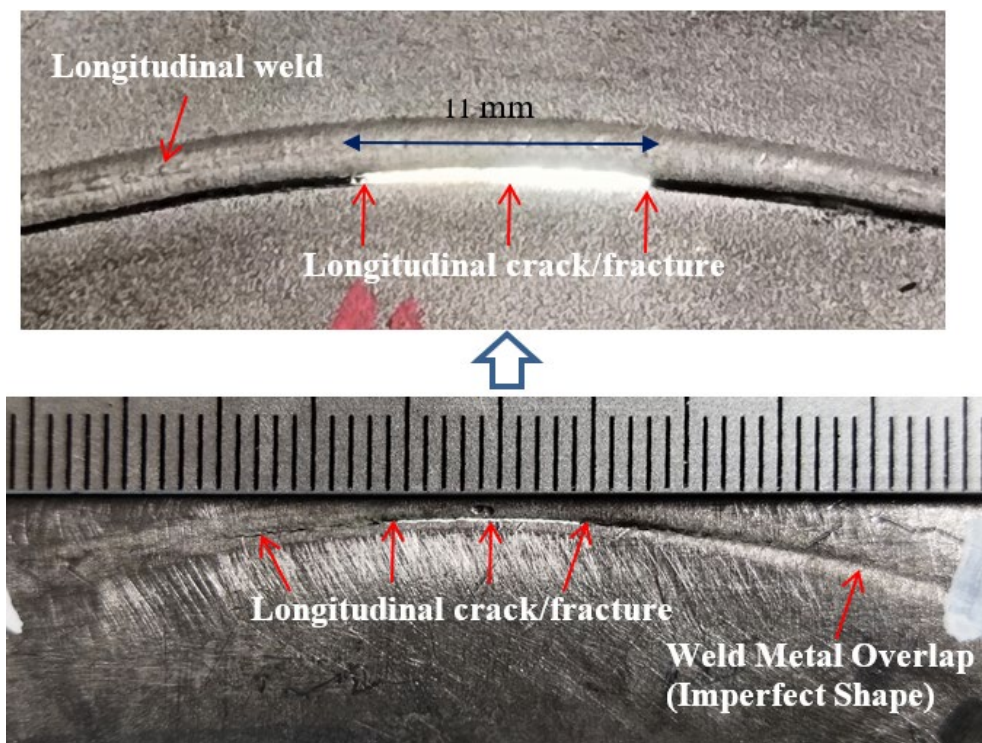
Close-up view of some internal wall of the elbow at leakage location revealing a crack or fracture in the longitudinal direction at the HAZ/fusion boundary of the longitudinal weld
